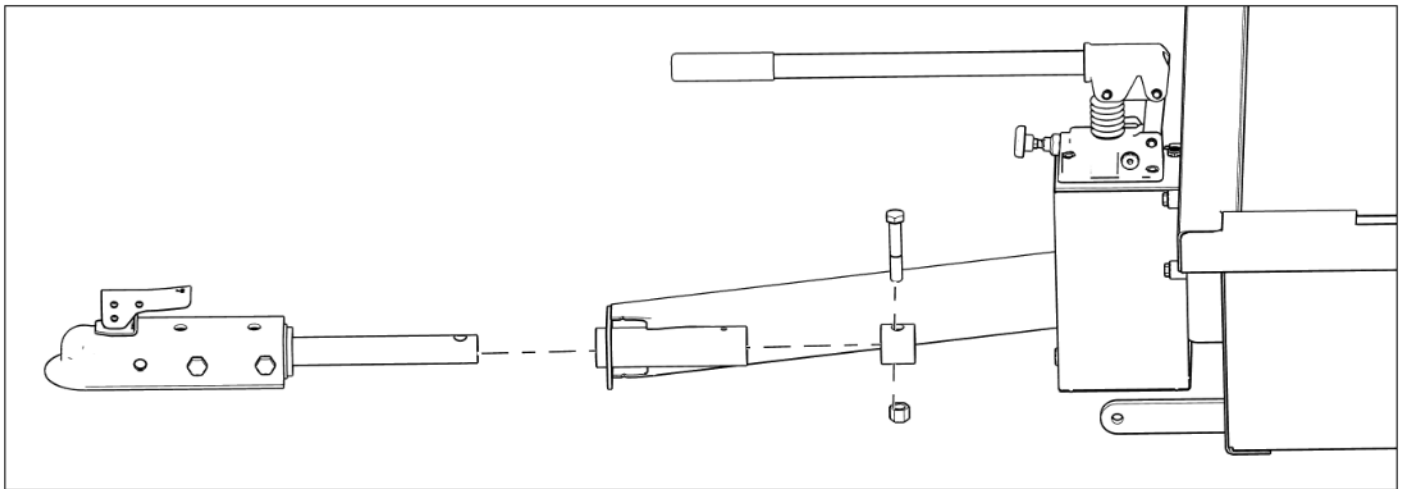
Insert Ball Coupler into Dump Trailer tongue and secure with spacer and hardware. Jack stand and portion of tongue removed for illustration purposes.
